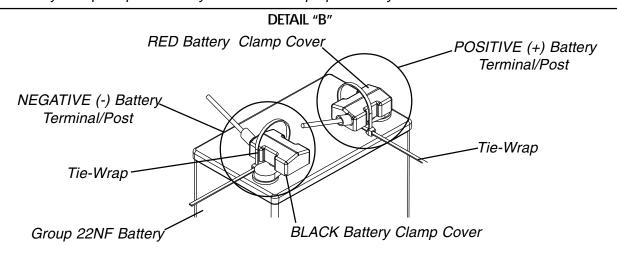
CONNECTING BATTERY CABLES - BATTERY CLAMP METHOD
